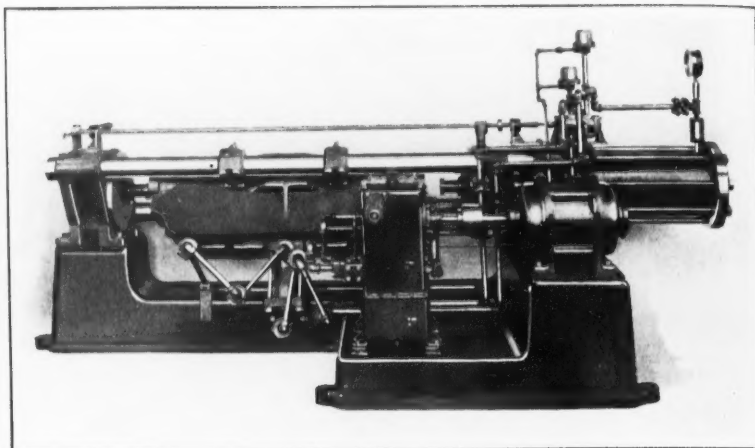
Rear View of a Truck-axle Assembling Press with Base, Work-fixture, and Other Parts Made from Cast Iron
